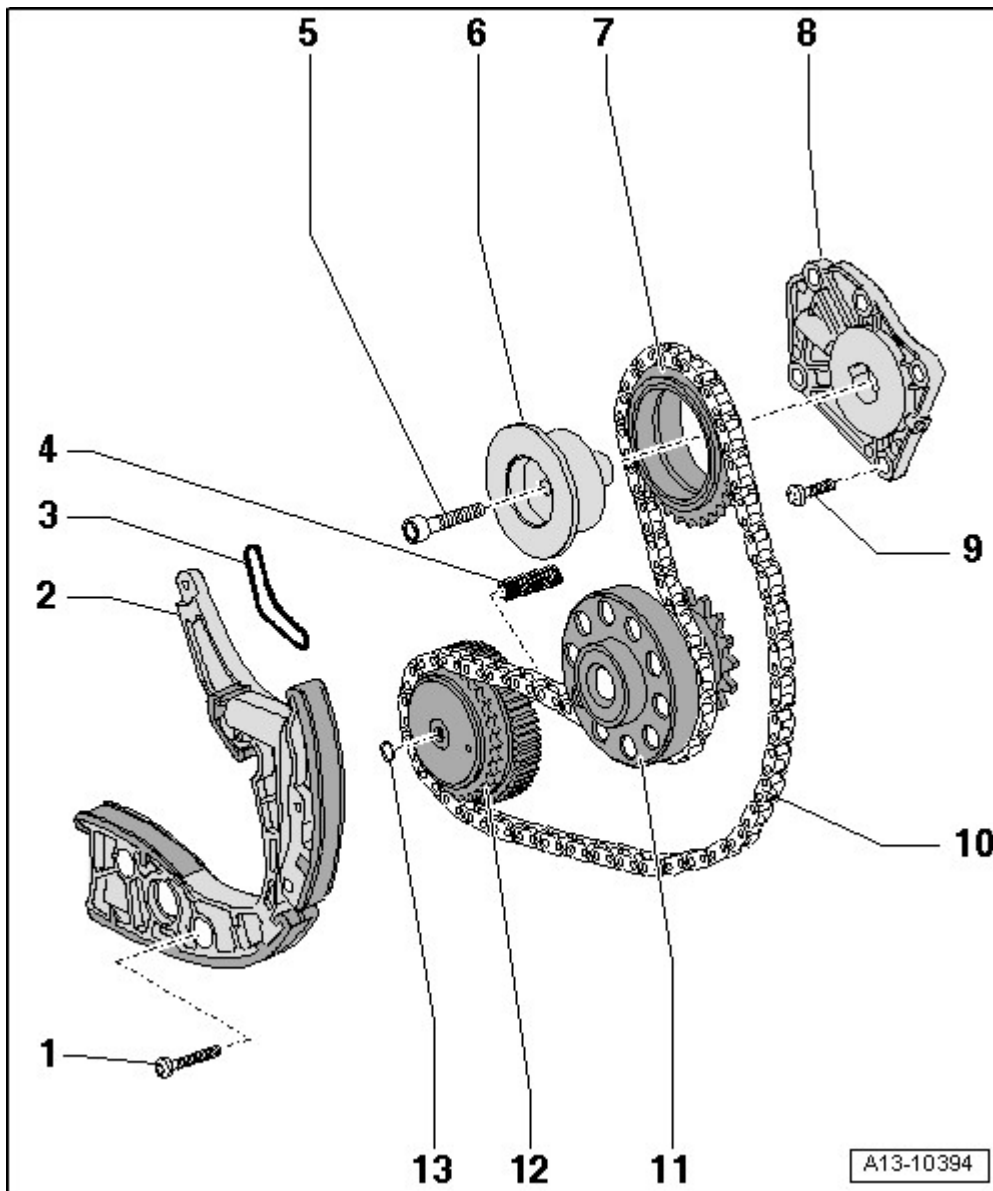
Identifying Power Take-Off Drive Chain, Assembly Overview
